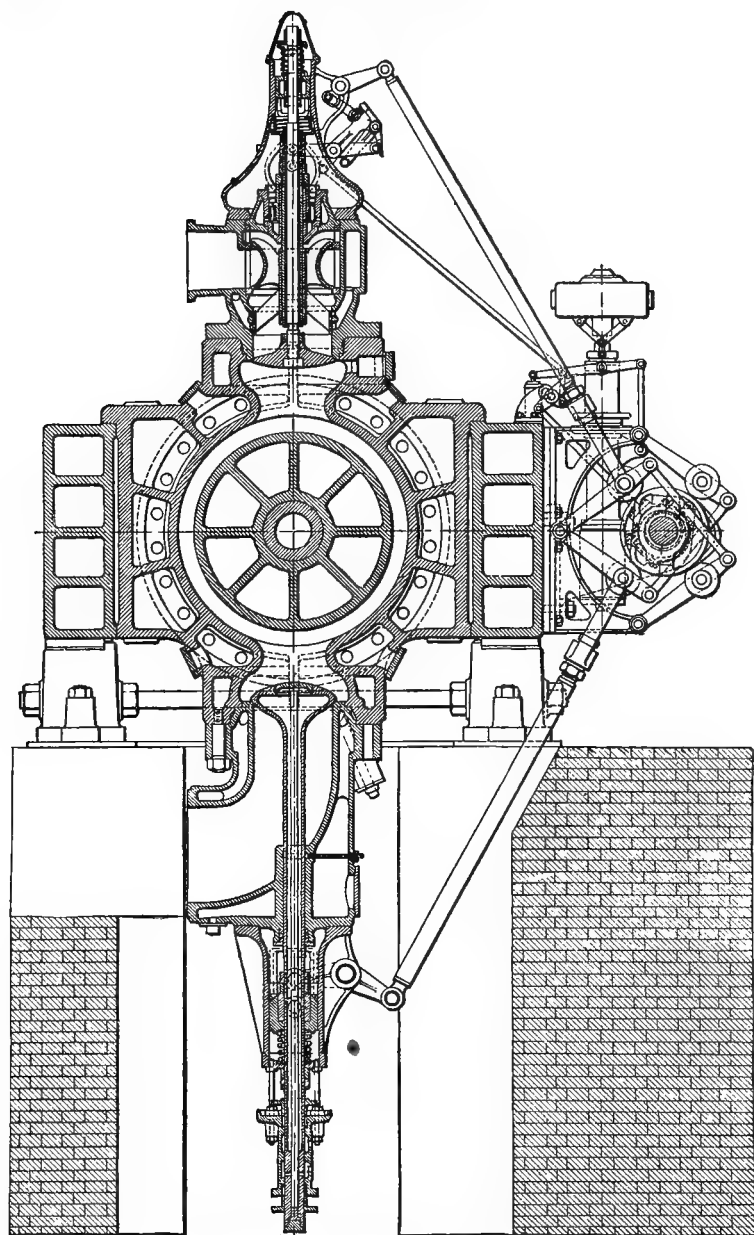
Cockerill Engine (Seraing, Belgium).
